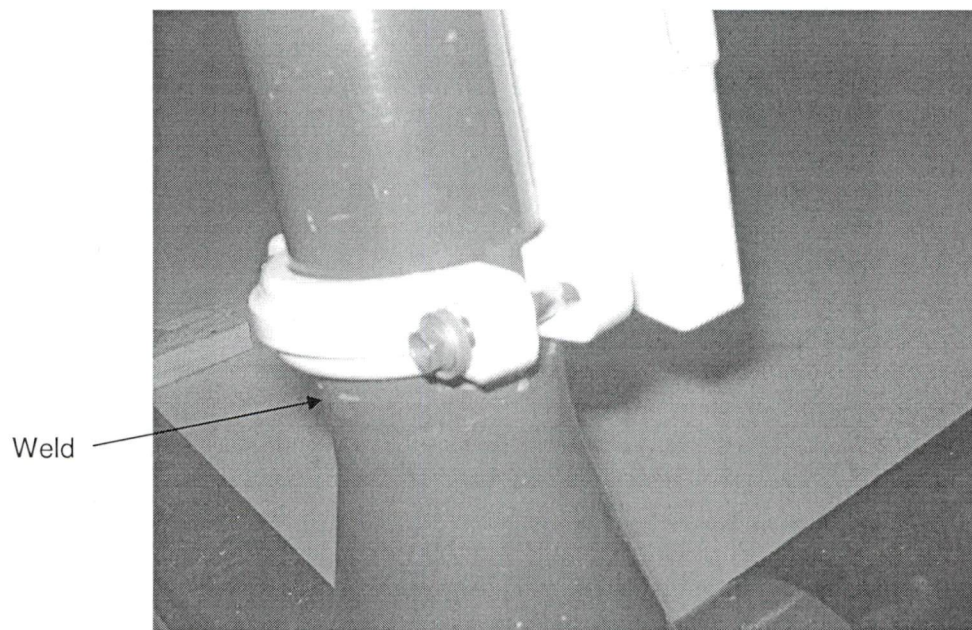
Forward Beam Installation, Bottom Clamp
